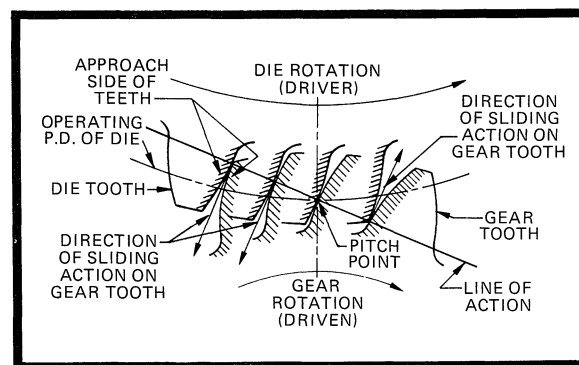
Contact action between one tooth of a workpiece and the approach side of a rolling die tooth.
